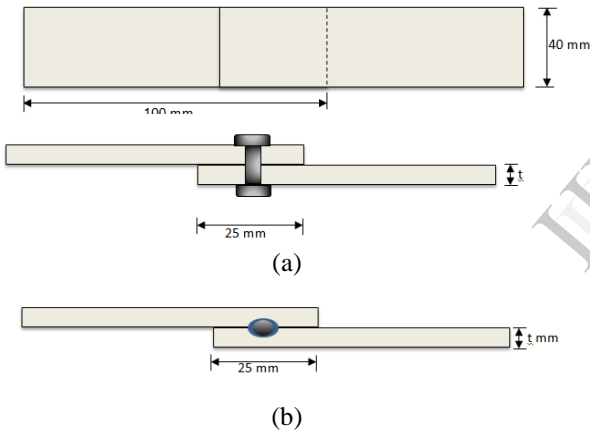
Joints in lap shear (a) riveted (b) RSW.
